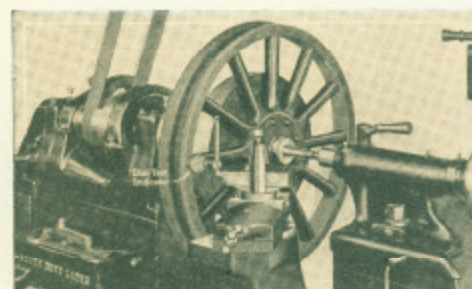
Wheels and Brake Drums Can be Tested and Machined When Diameter Does not Exceed 24"
